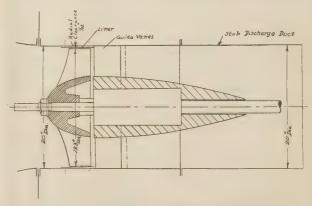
Arrangement of Three-Bladed Propeller in Casing
